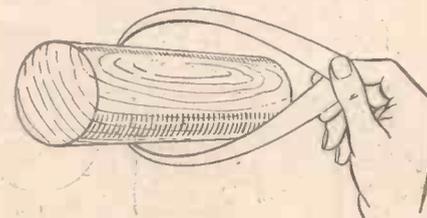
(centre).—Method of using calipers on cylindrical work.
